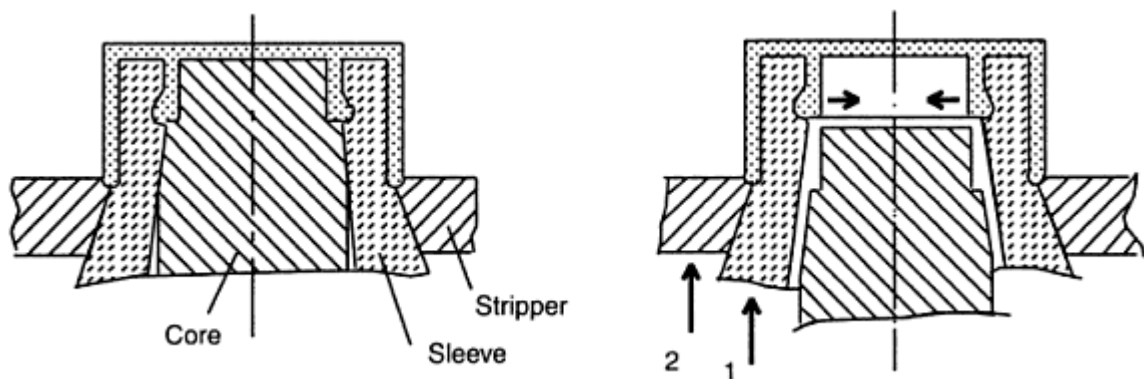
Example of product with undercuts, which must be ejected in two-stages: 1. - sleeve and stripper lift the product off core, 2. stripper continues to push the product out. [21]
